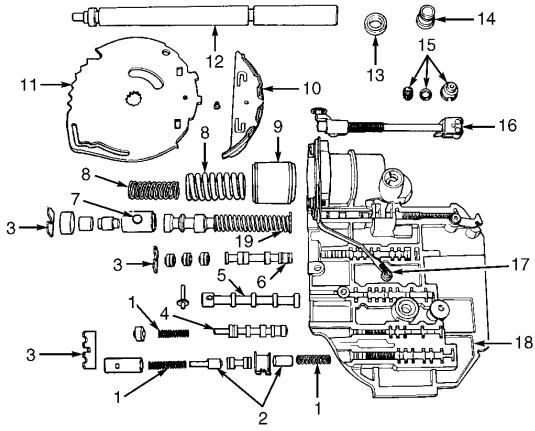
Identifying Valve Body Retainer & Check Ball Locations Courtesy of CHRYSLER CORP.
